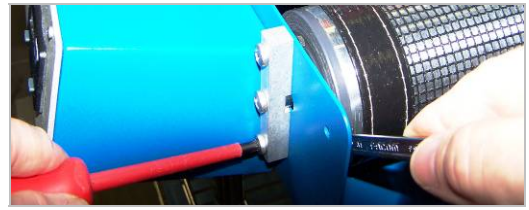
Loosen the Drive Roller Shaft Support Support Fasteners (bottom)
